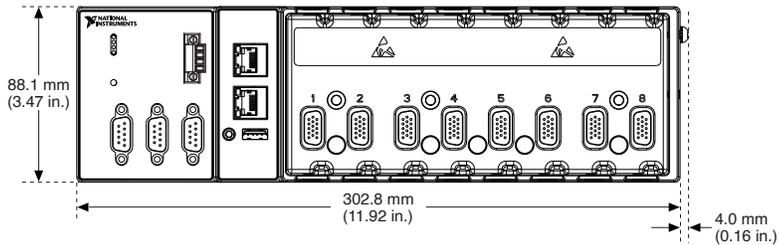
cRIO-9064/9065/9066 Side Dimensions, Typical
